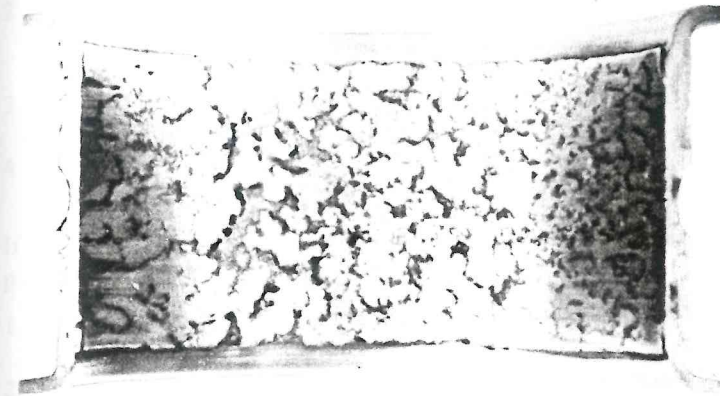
Bearing corrosion. (Courtesy of Glacier Metal Company Ltd., Wembley, England.)
